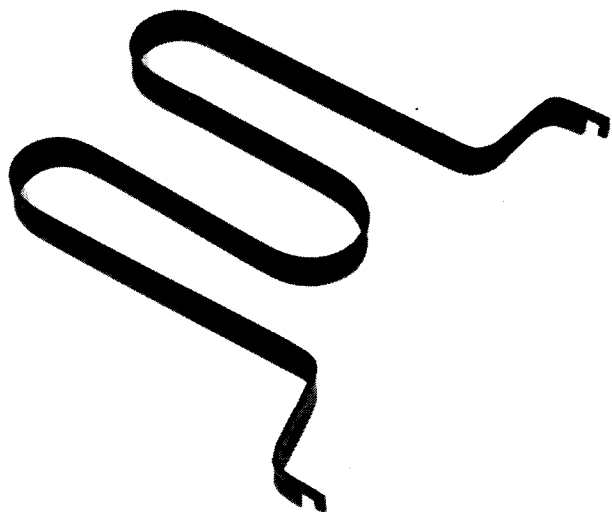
Air Conditioning Outlet Remover and Installer Tool J-24612
